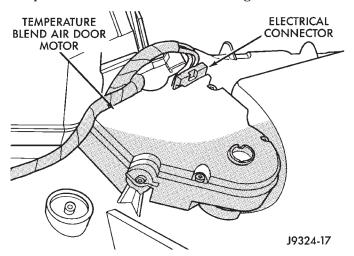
Temperature/Blend-Air Door Motor Remove/ Install
